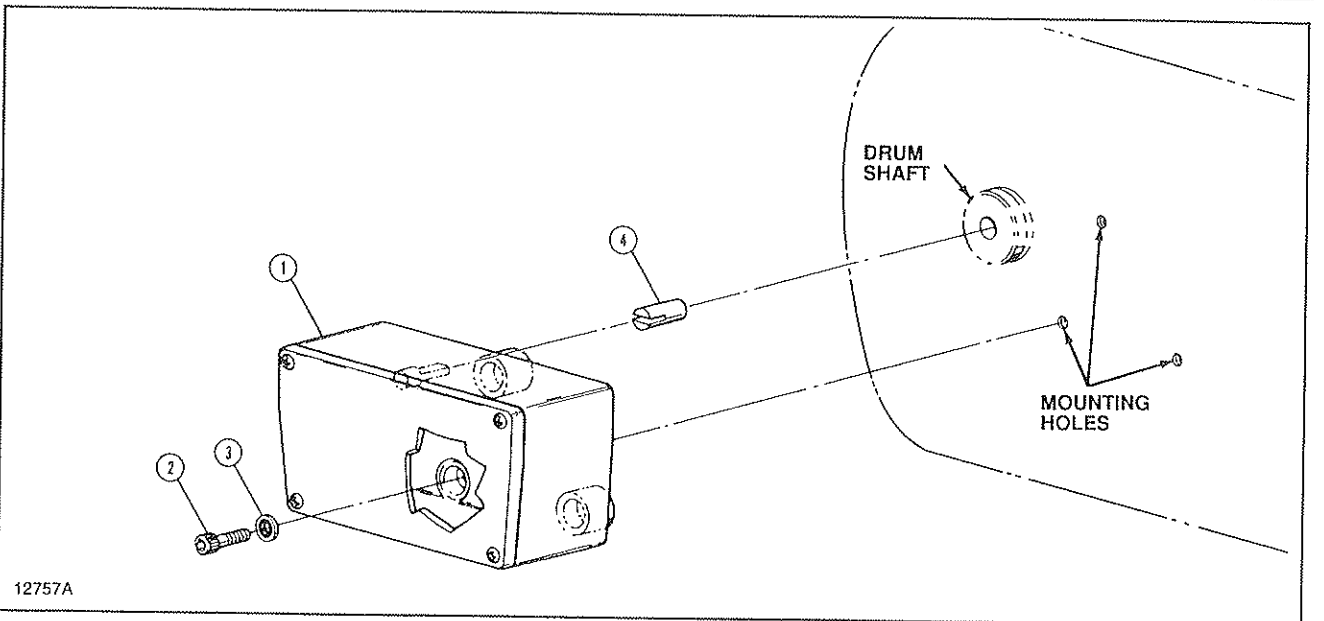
Upper & Lower Limit Switch — Geared Rotary Type.
